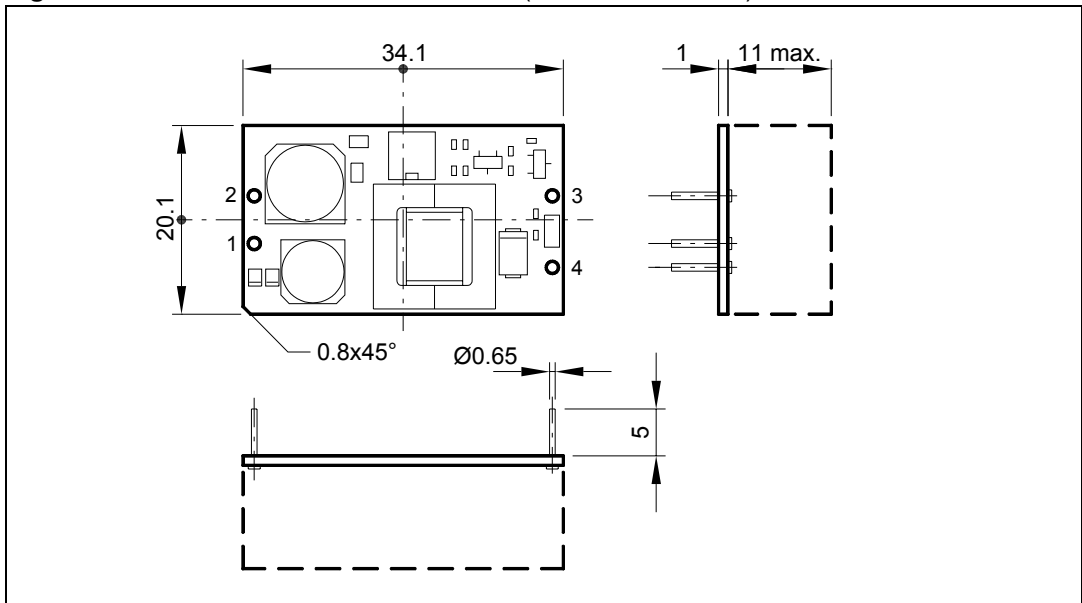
SPDC400FC mechanical data side view (dimensions in mm)
